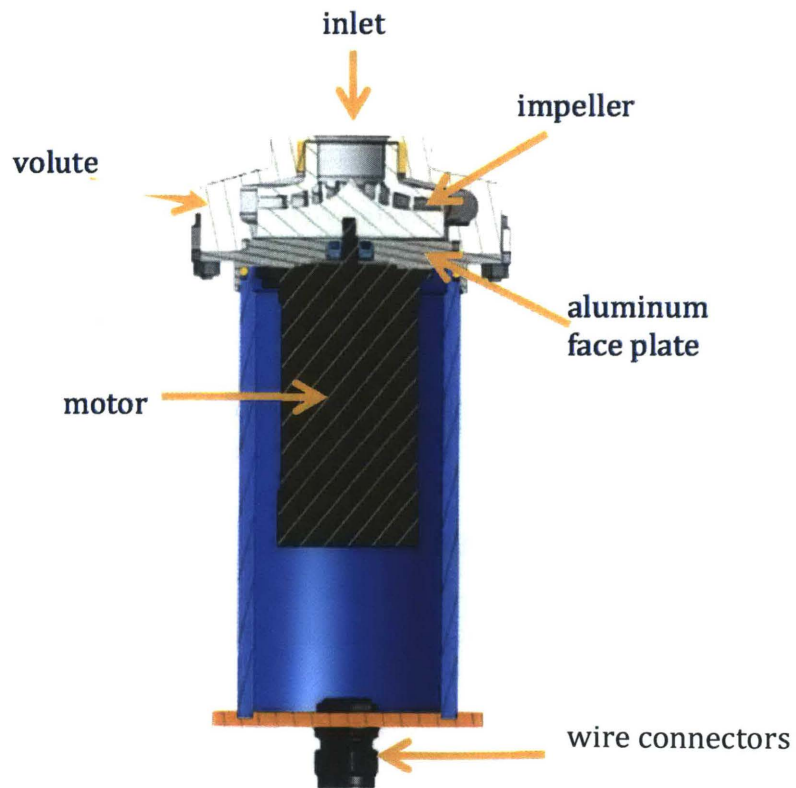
Cross-Sectional View of CAD of Final Pump Prototype
